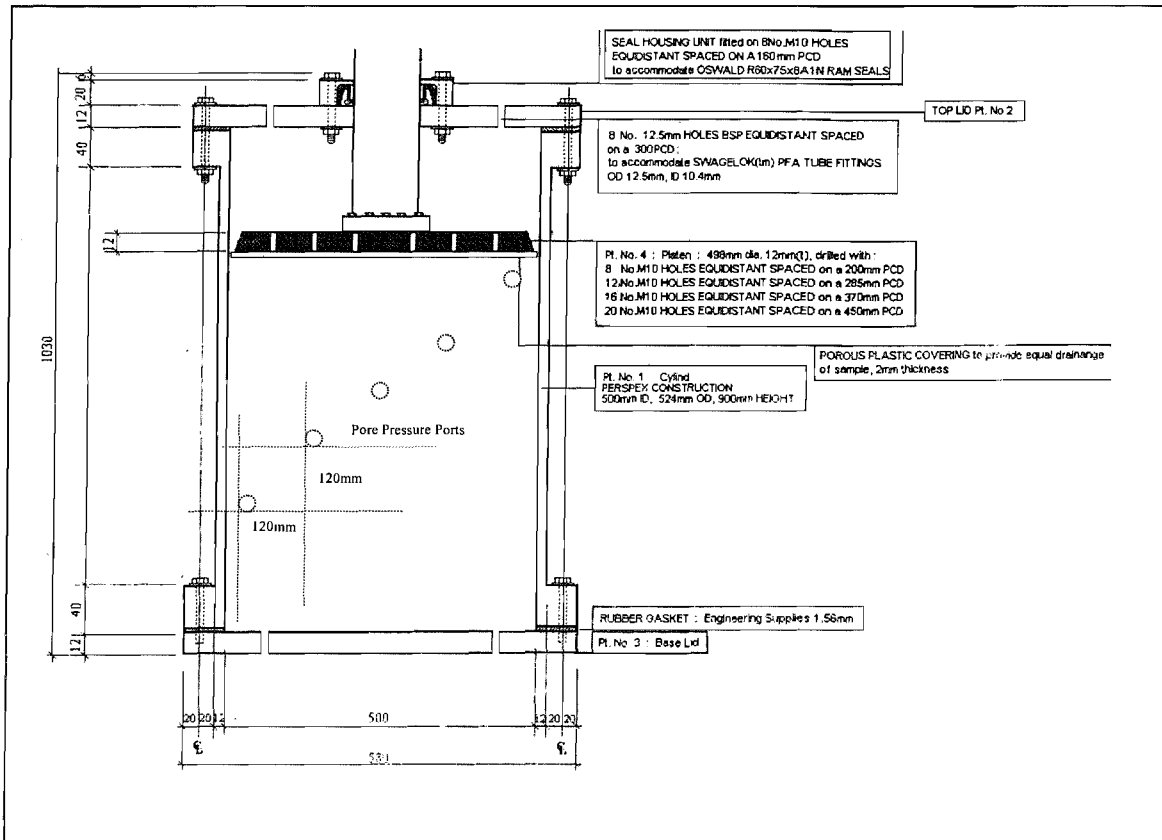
Design drawing of the Perspex test cell with loading platen assembly
